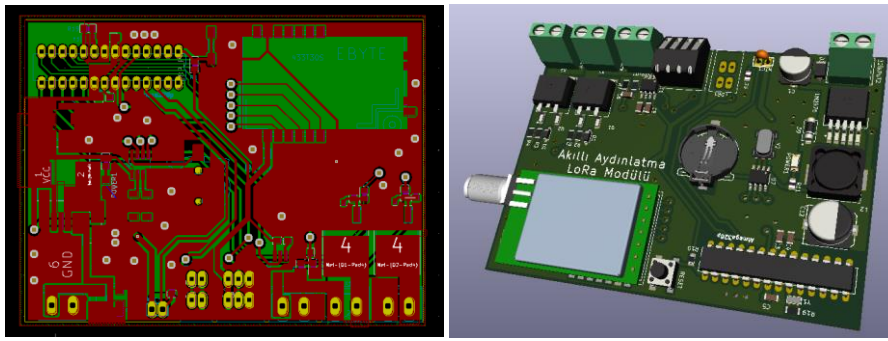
Smart Lighting Sensors and Lora PCB Module Footprint and 3D Design
